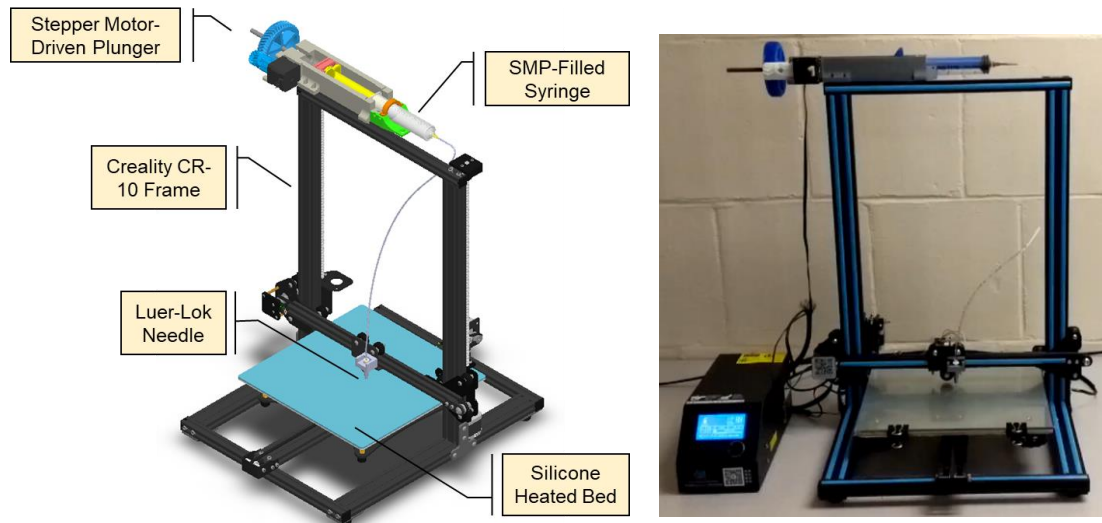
CAD rendering of the prototype DIW printer (*left*), and photo of completed prototype DIW printer (*right*).
